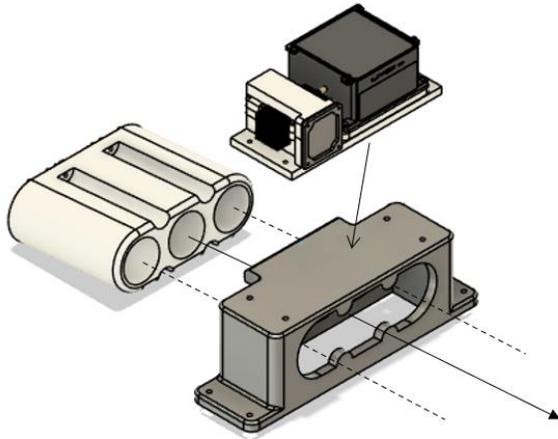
Exploded view of updated ball launcher mount showing attachment to perception system platform.
